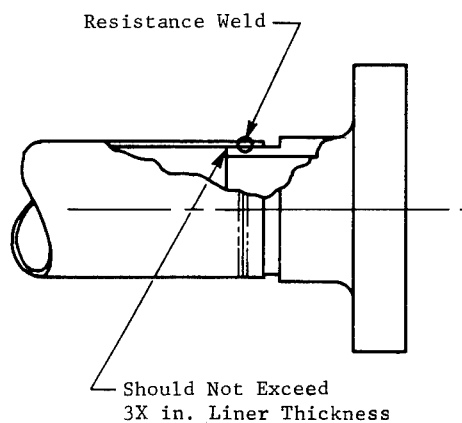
Attaching Fitting to Liner Using Resistance Weld
